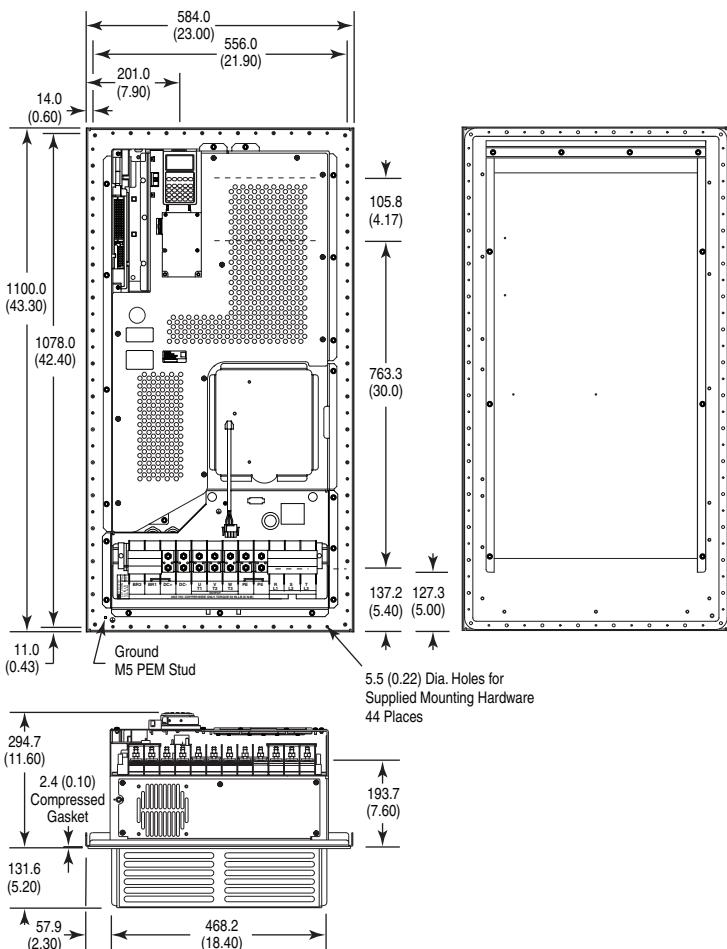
Frame 6 NEMA/UL Type 12 Standalone (400...690V drives only)
